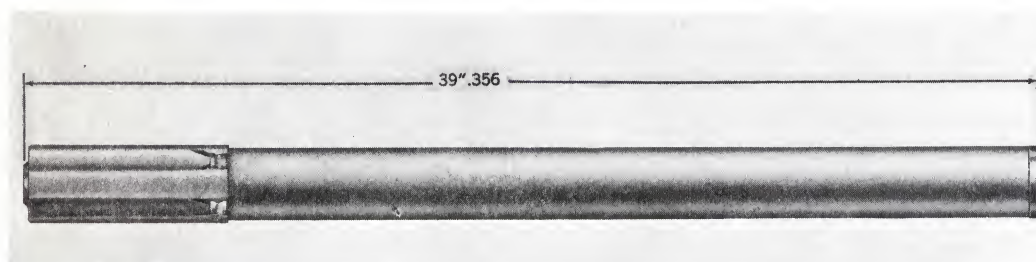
2.75-Inch Rocket Motor Mk 4 Mod 0, External View, With Fin Protector in Place.
